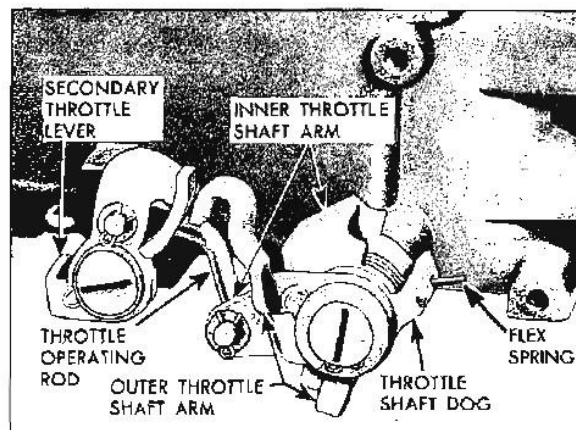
B-90 Primary and Secondary Throttle Linkage Installed
